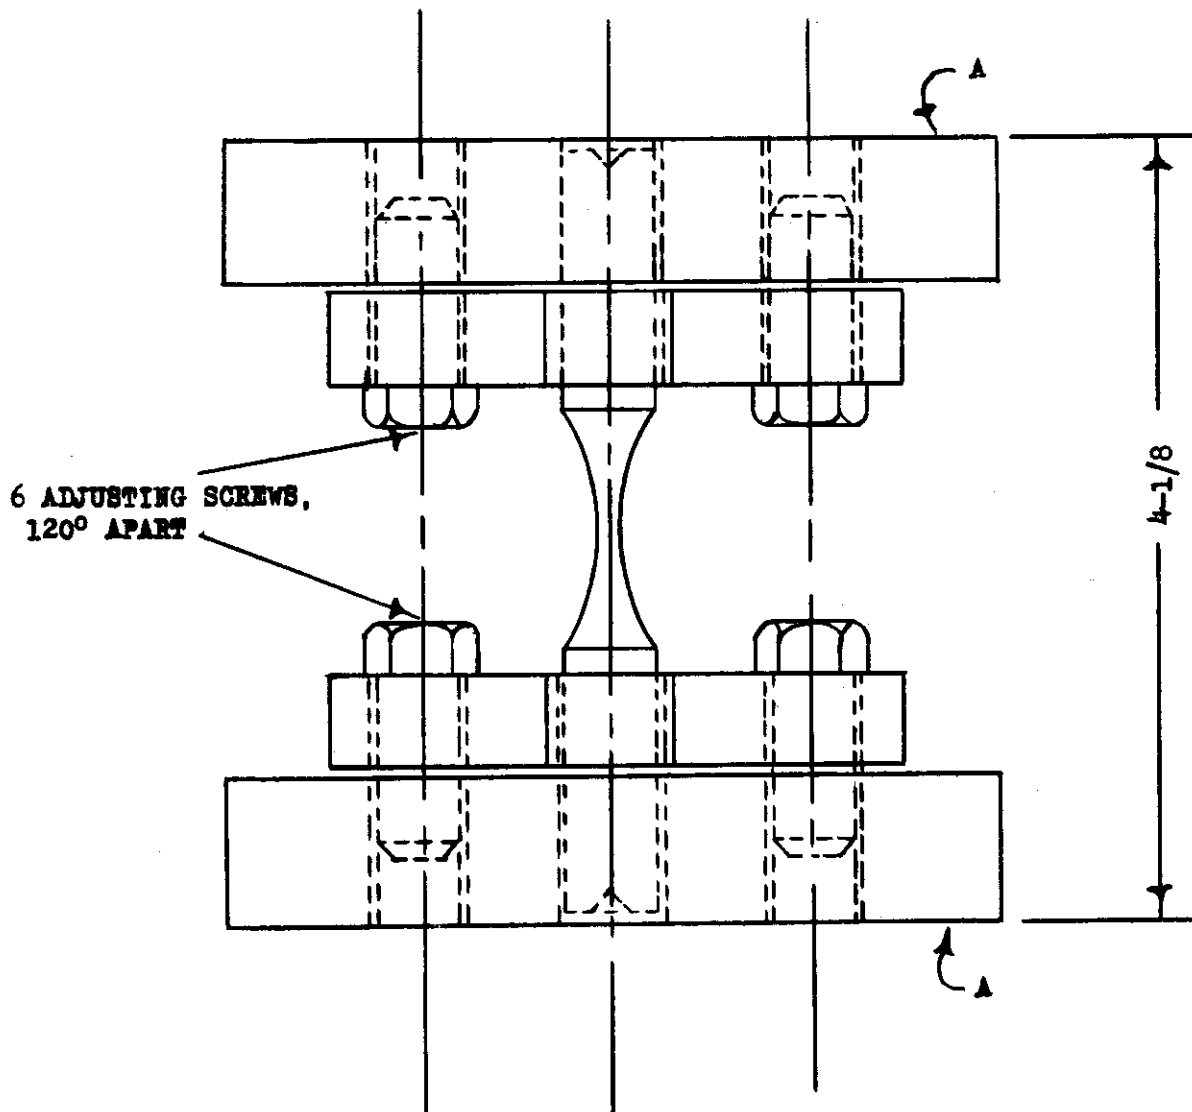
ASSEMBLY OF ALIGNING FIXTURE AND FATIGUE SPECIMEN.
